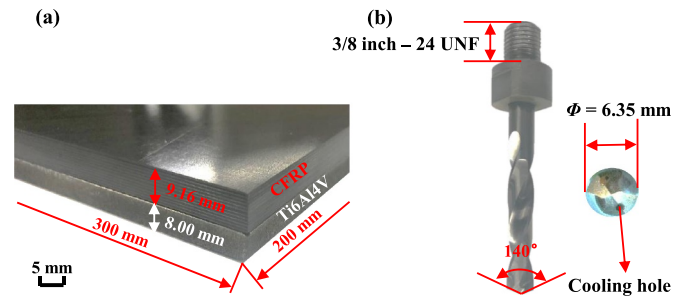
Photographs showing (a) the utilized multilayer CFRP/Ti6Al4V stack and (b) the uncoated carbide threaded shank drill.
